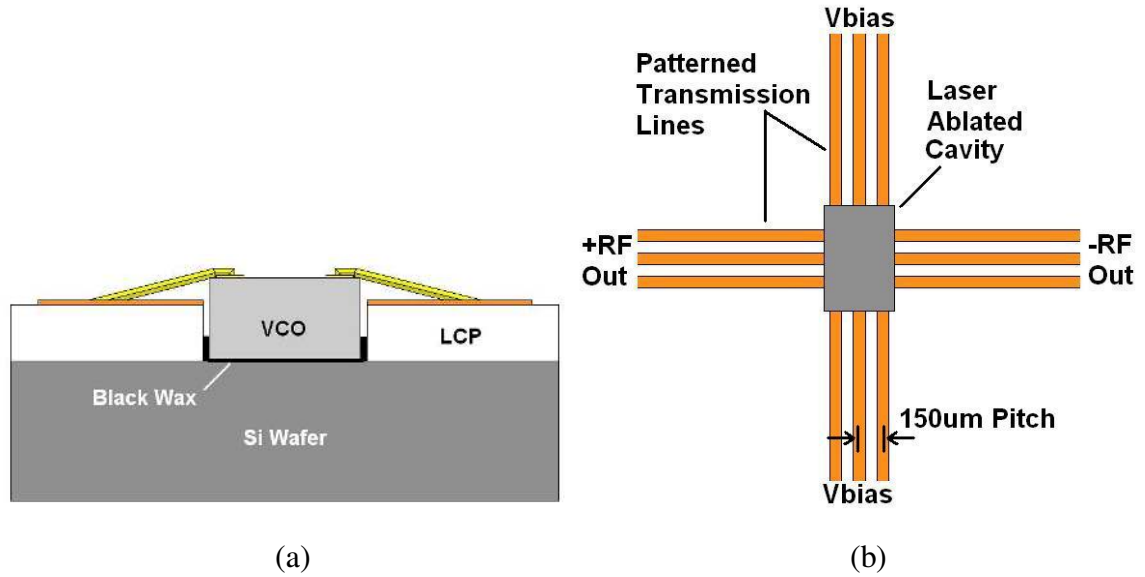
a.) Cross-section and b.) Overhead view of the wire bond VCO package.
